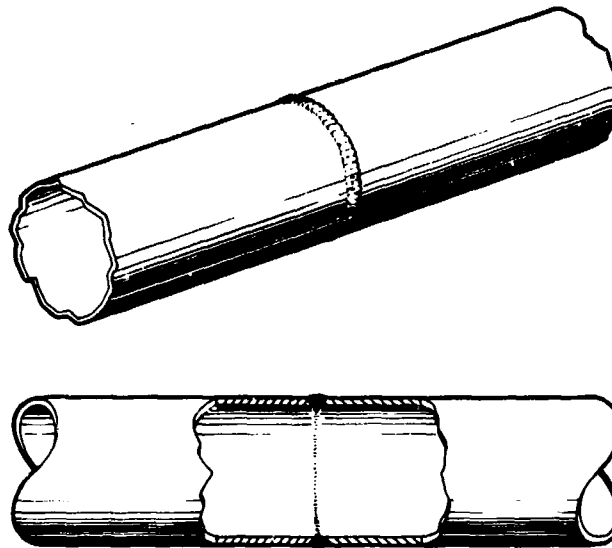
Straight Butt Tube Weld Joint
